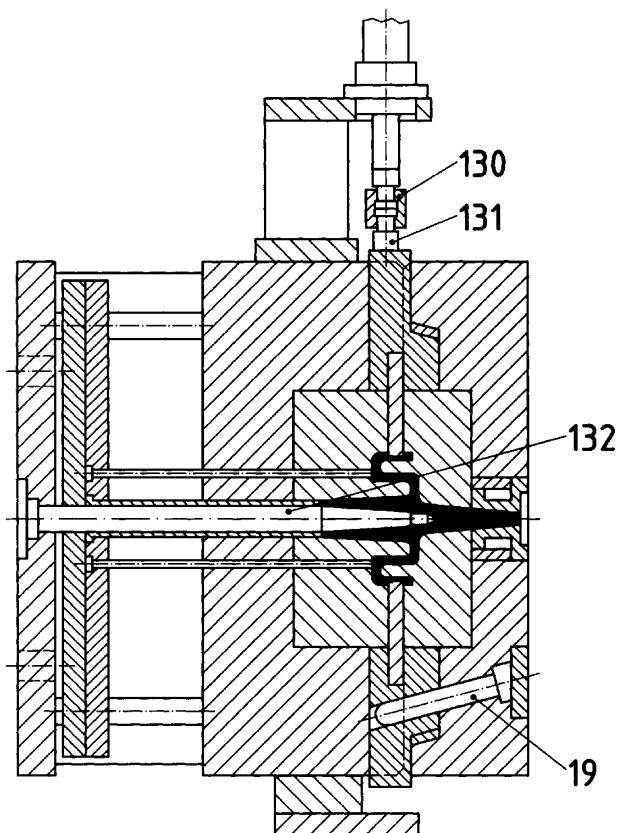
Diecasting die for cold-chamber diecasting machine with vertical pouring sleeve
